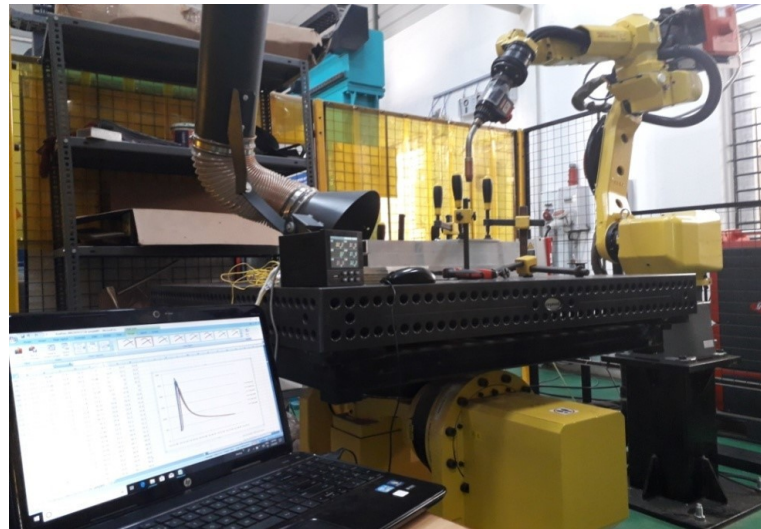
Fully Automated GMA Welding Machine with Data Acquisition
